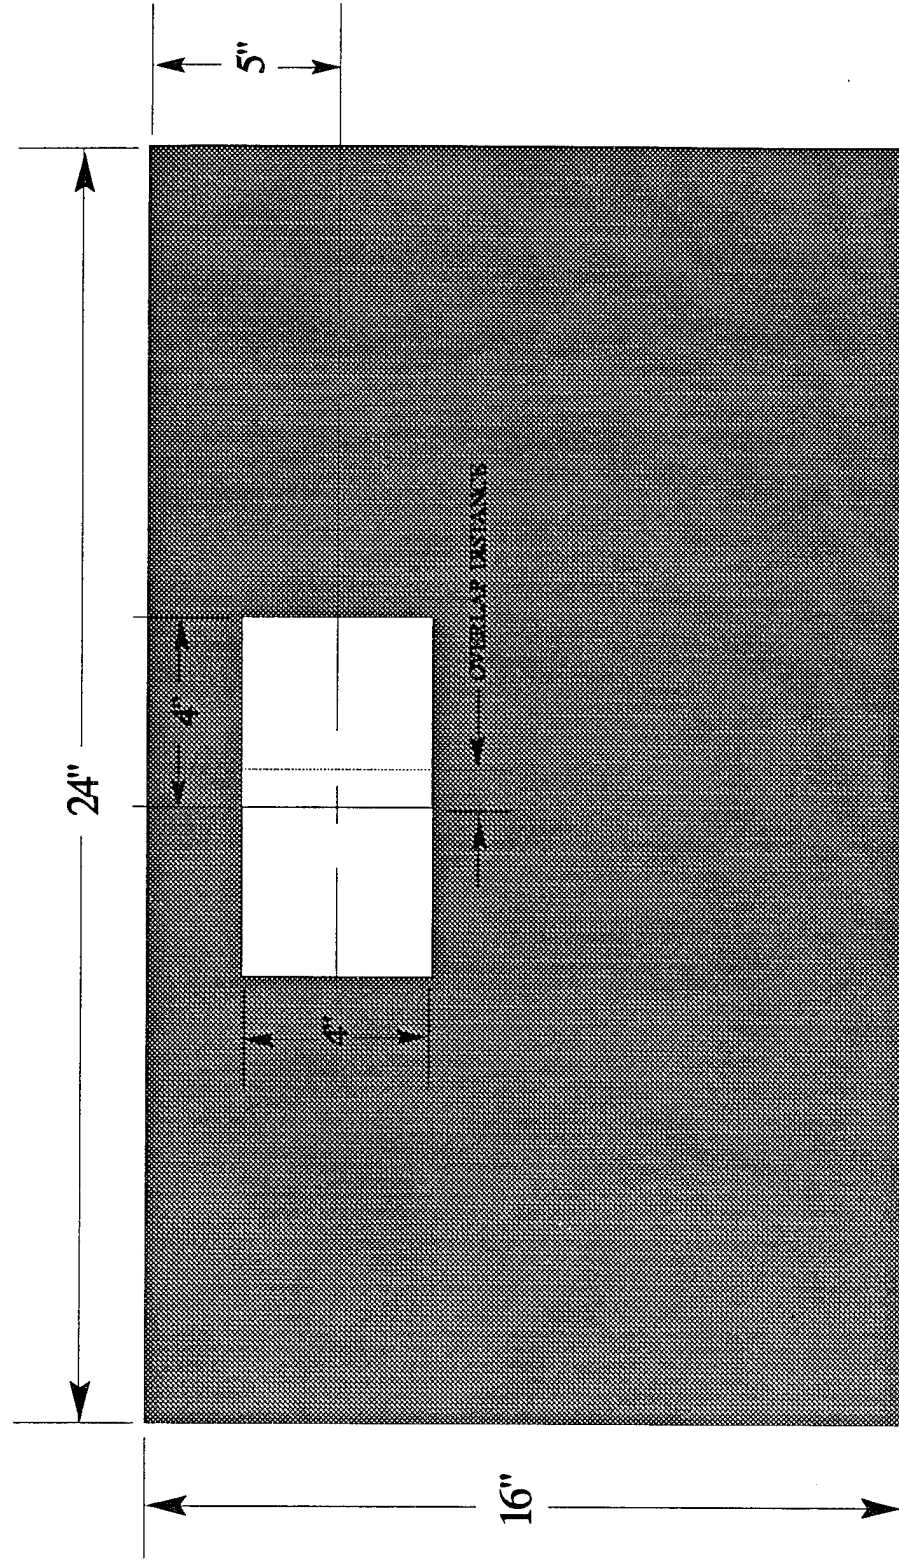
CARGO LINER PATCH SHINGLING TEST
